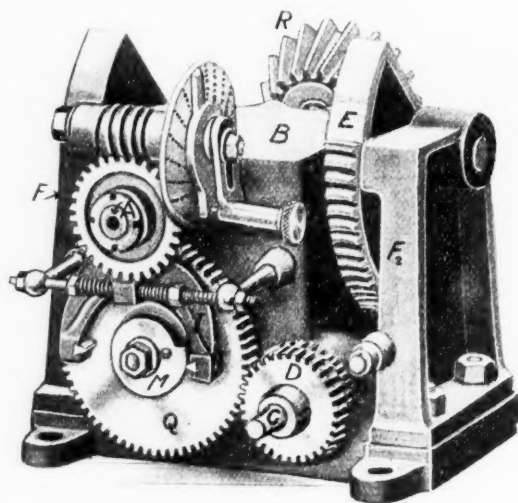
Shaper Attachment devised by Professor Kroll, in which a Circular Templet is used for Forming the Teeth of Bevel Gears.
